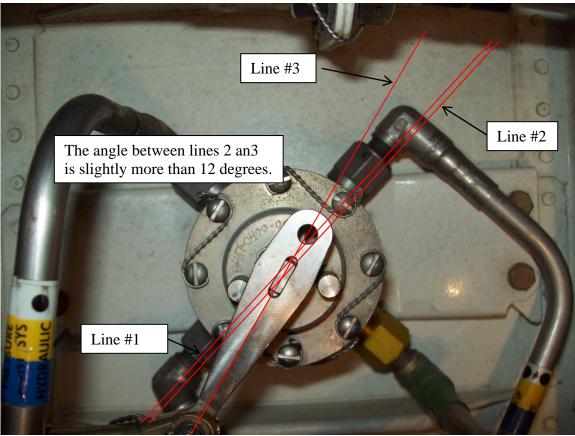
Landing gear selector valve position - Photo 2 w/angles
